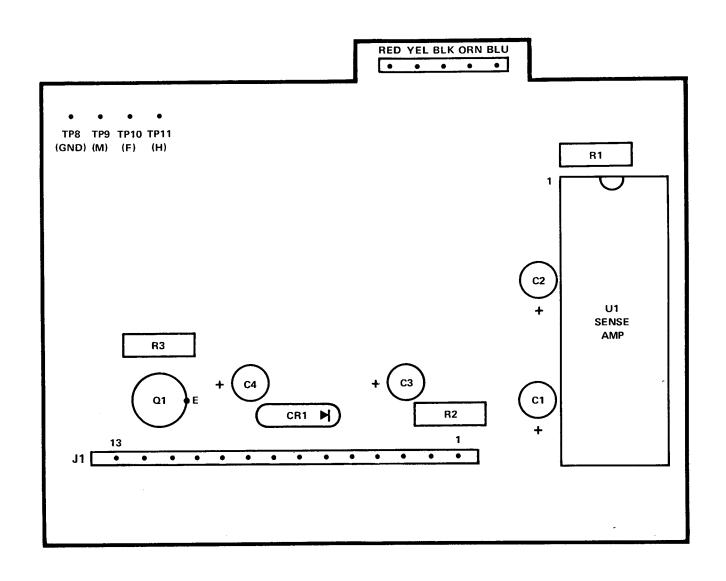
Card Reader PCA (A3A1) Component Location Diagram
